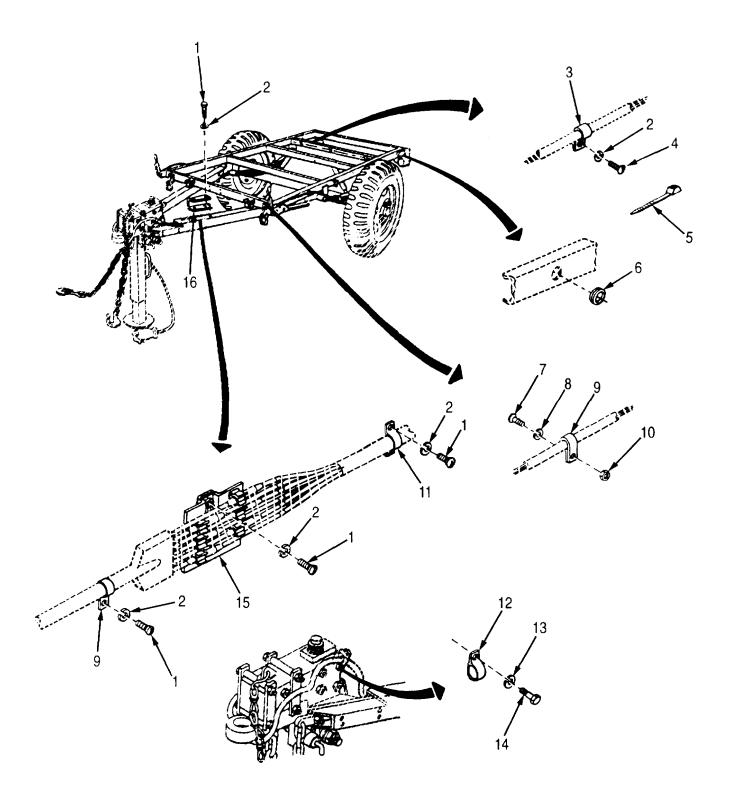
Wiring Harness and Intervehicular Cable Attachments (Sheet 1 of 2)
